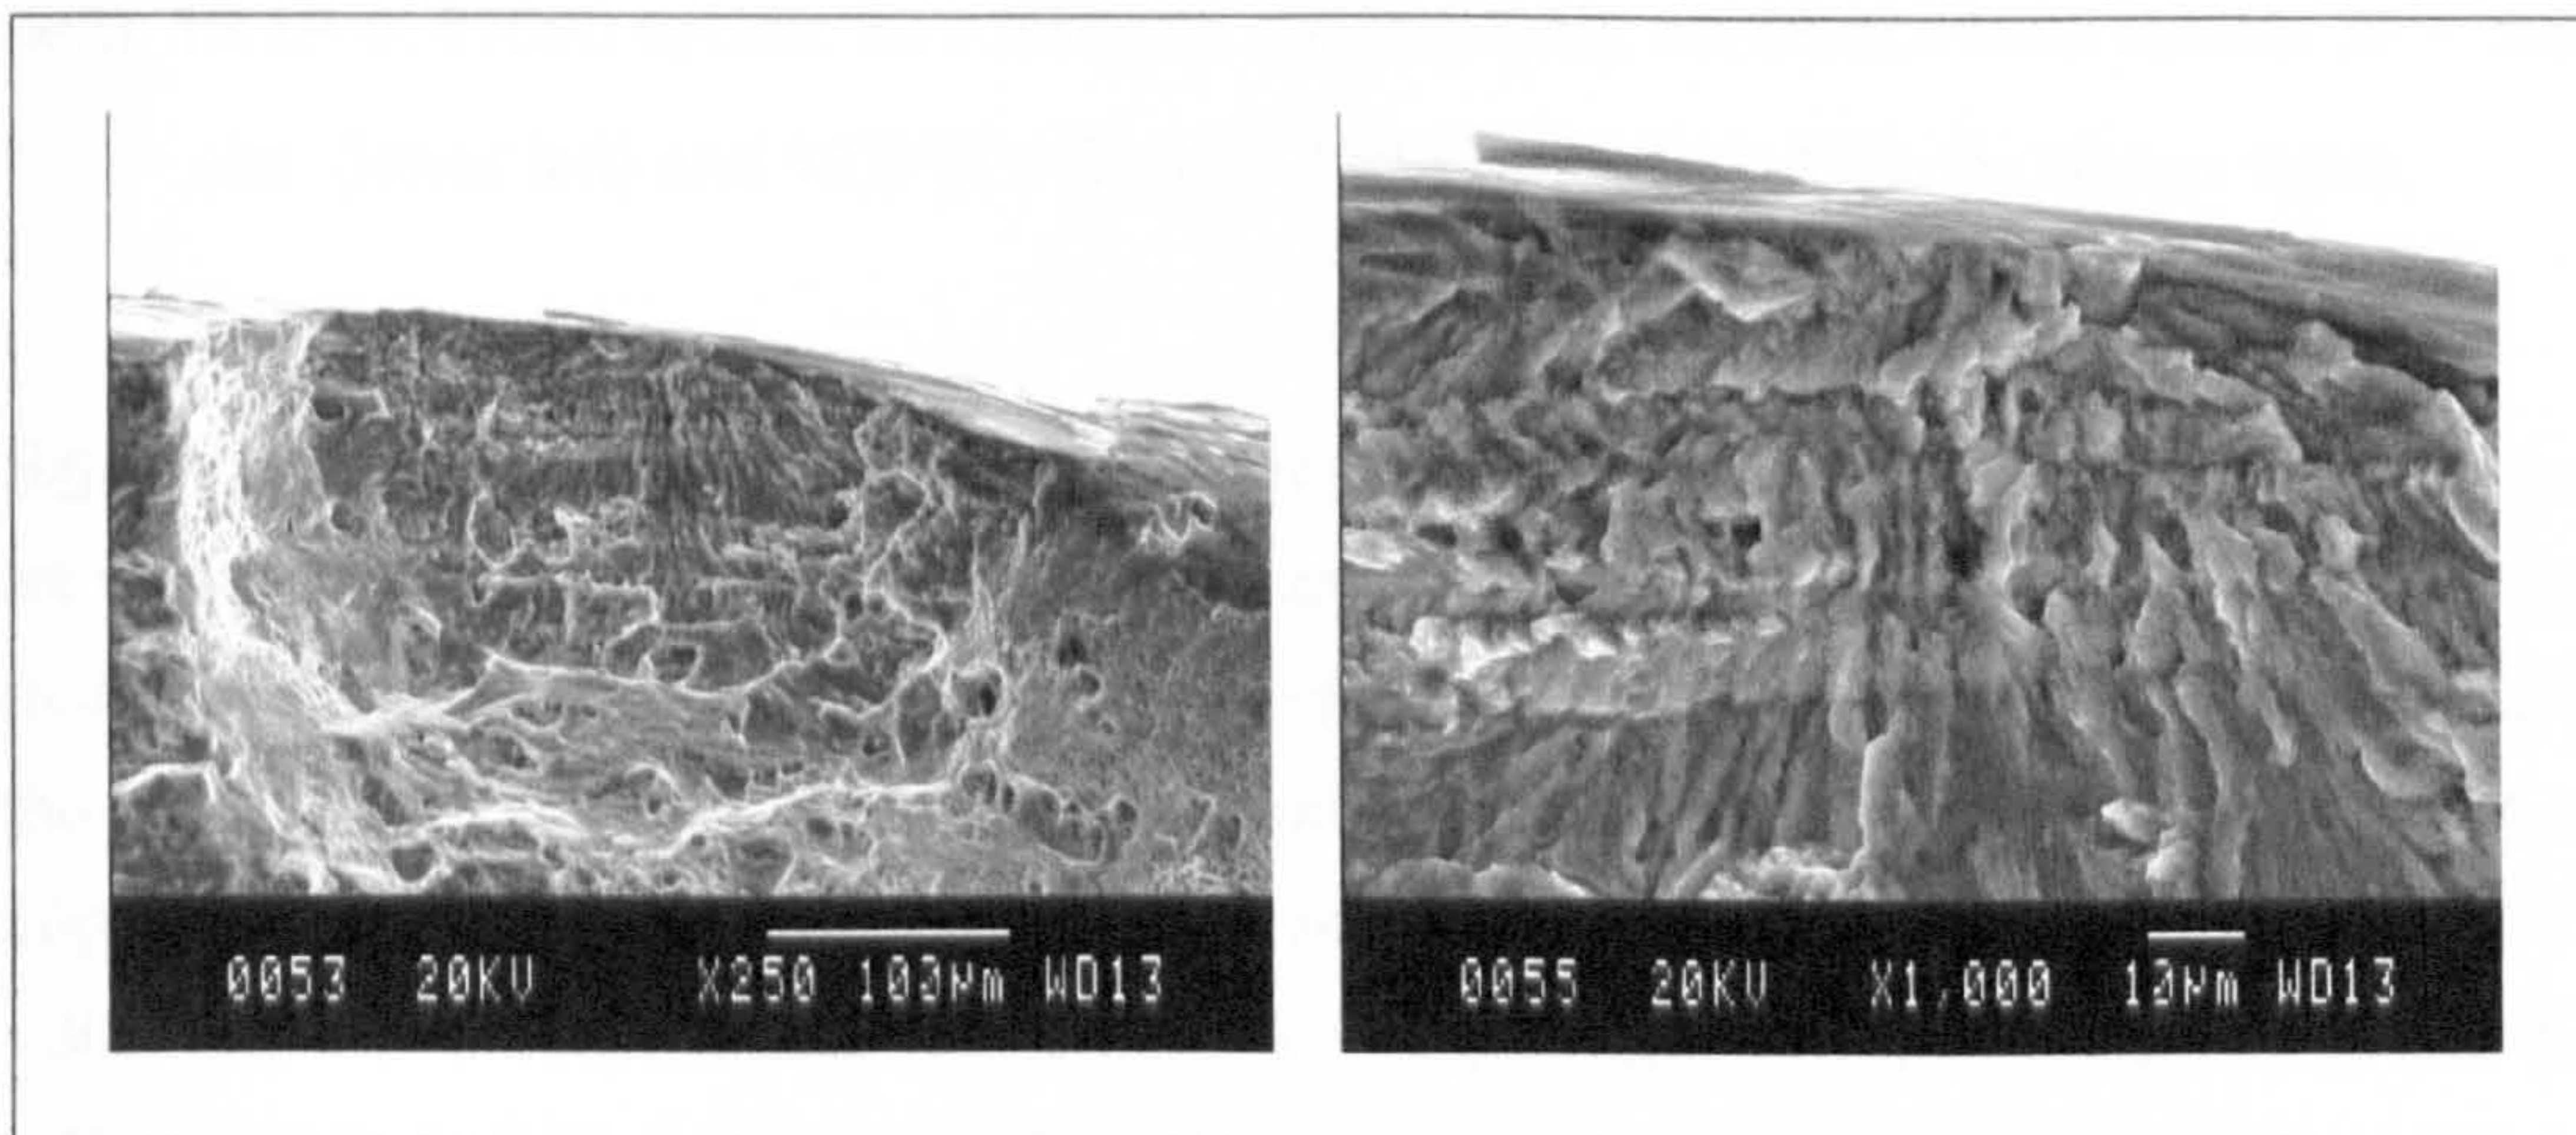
FS DPA SCG secondary crack fracture surface (left) and initiation site (right).
